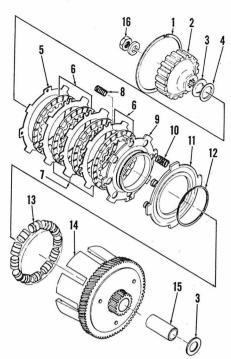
Exploded view of the automatic clutch used on MF-3 and U-5 models.
